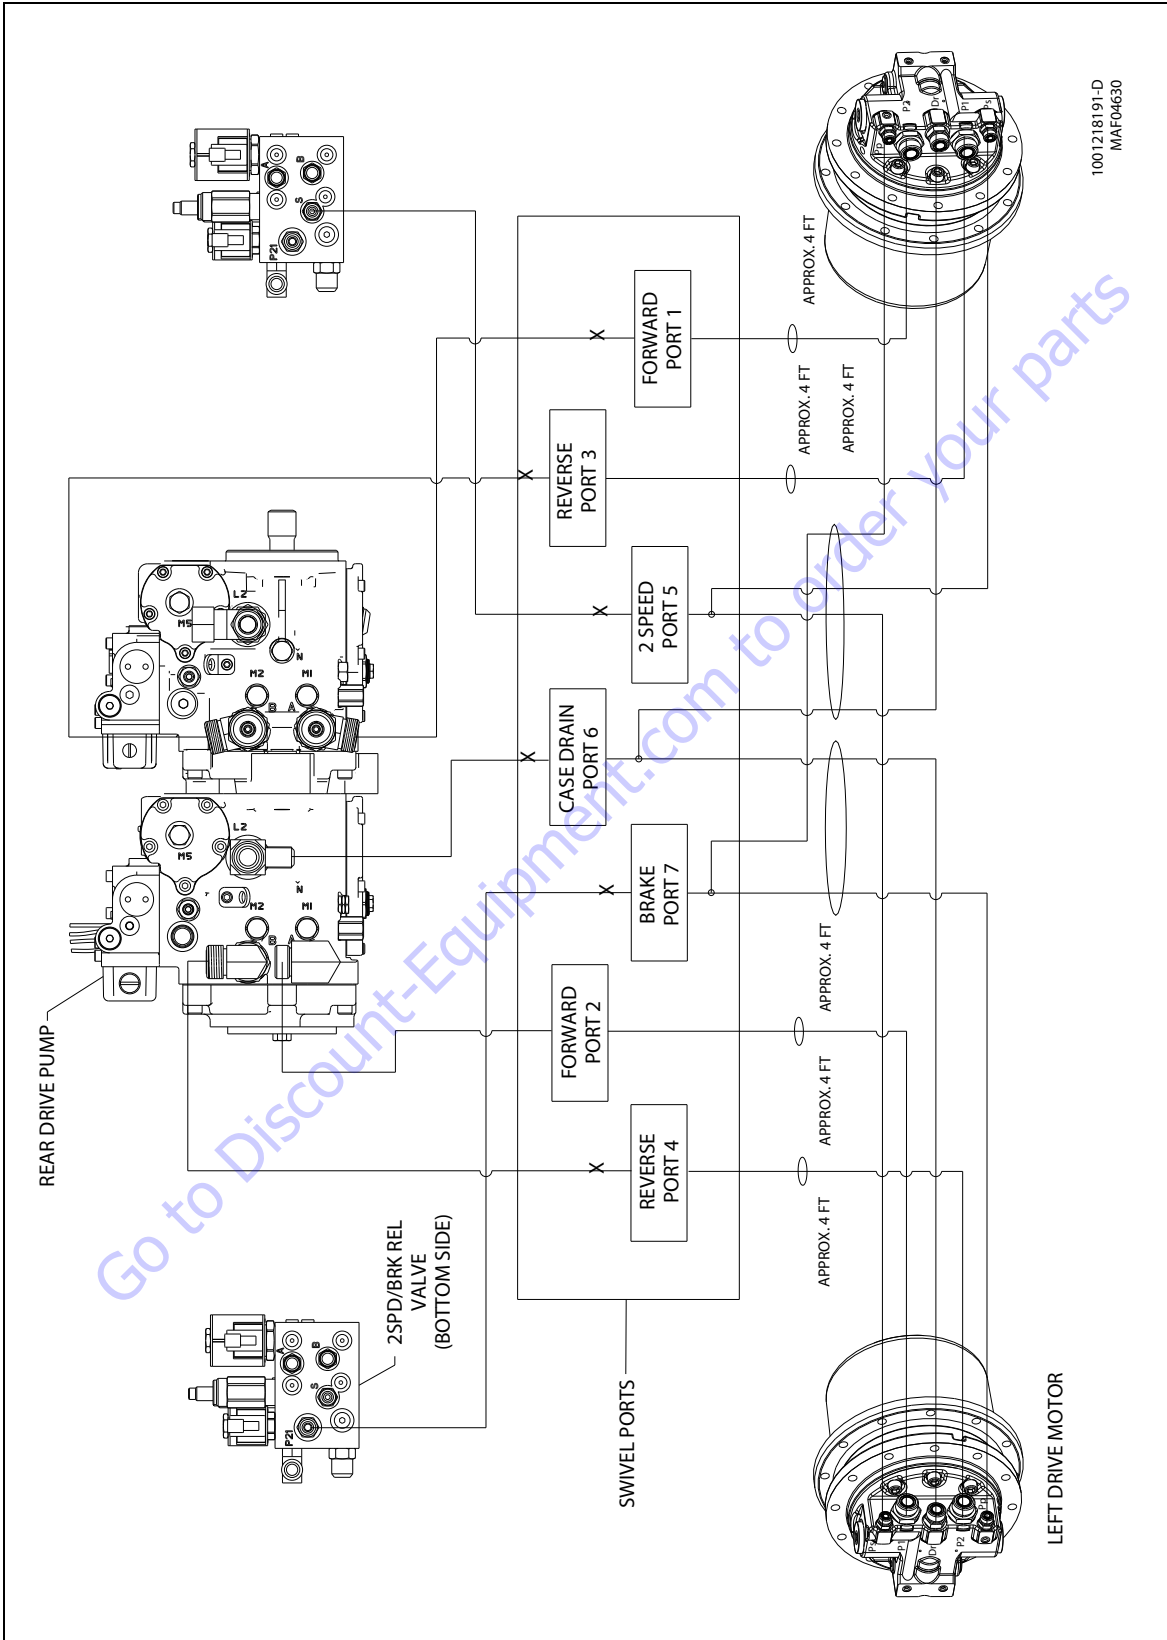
Hydraulic System Installation (460SJC) - Sheet 2 of 15
